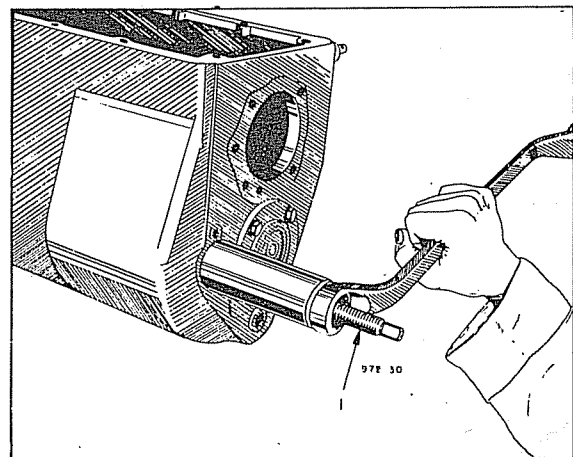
Removing Reverse Idler Shaft (Tool C-603)
